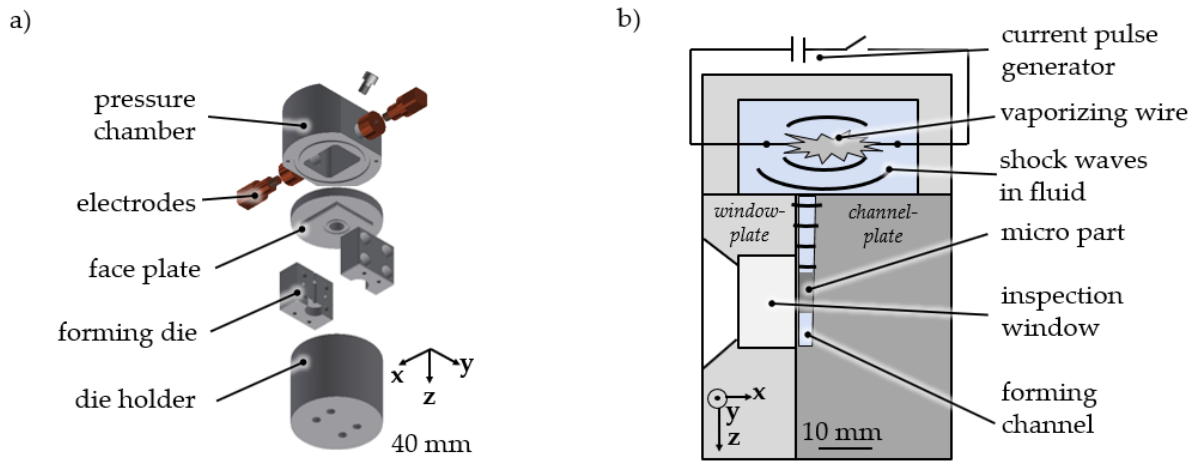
Forming set-up; a) general assembly (die according to Fig. 1), b) multi-stage channel (dies according to Fig. 4)
